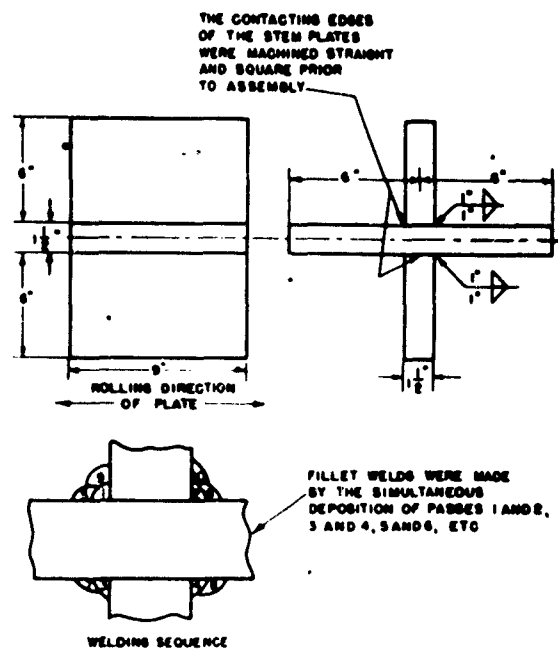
Details of Preparation of Multiple-Pass-Welded Cruciform-Shaped Specimen
